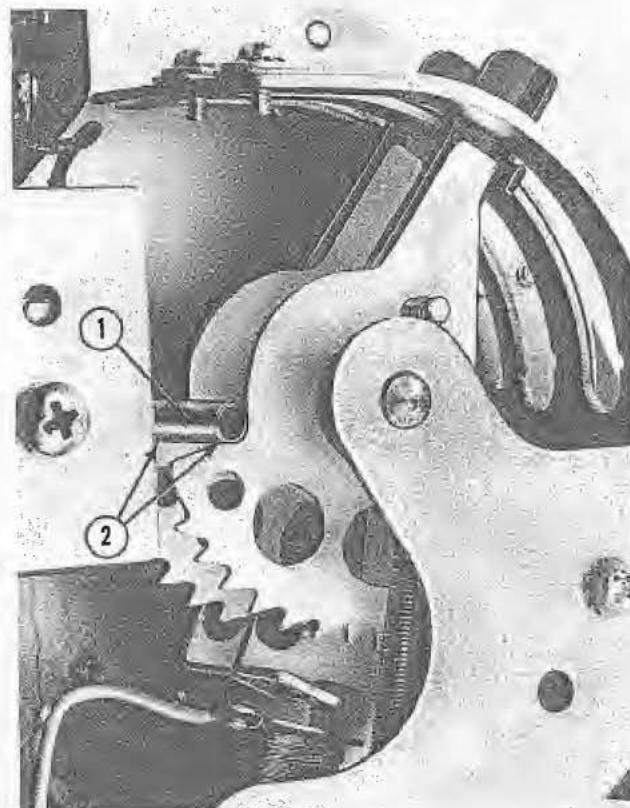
STOP LEVER AND QUADRANT INDEXING STRIP ADJUSTMENT
